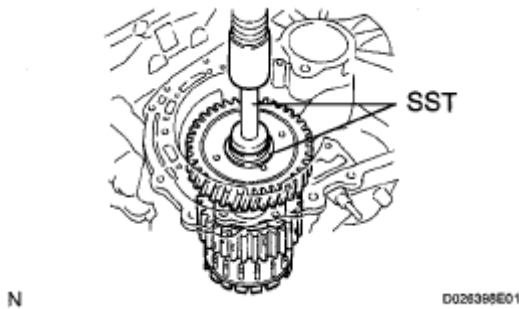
Removing Front Planetary Gear Assembly From Counter Drive Gear
